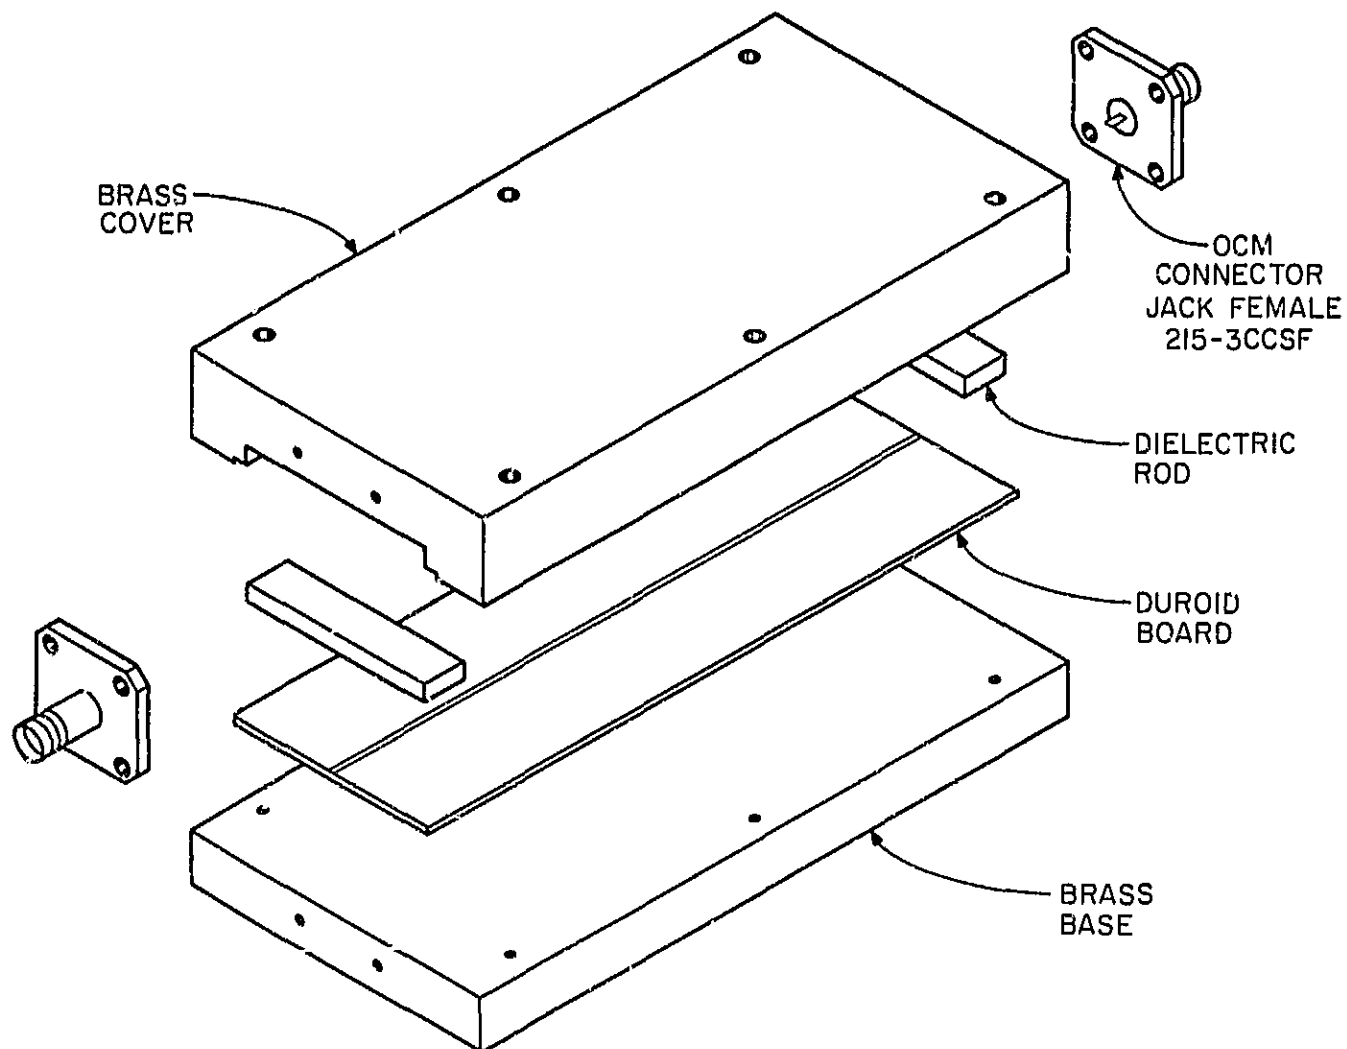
Assembly drawing of test fixture. Note pressure connection between connector pin and circuit board.
